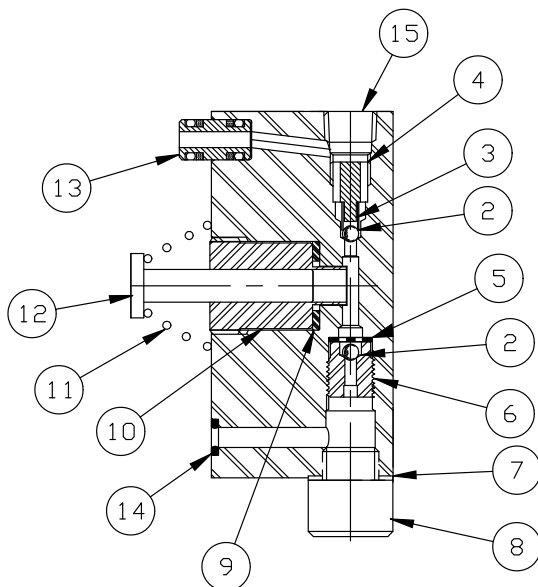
69082SR Eccentric Shaft Assembly
